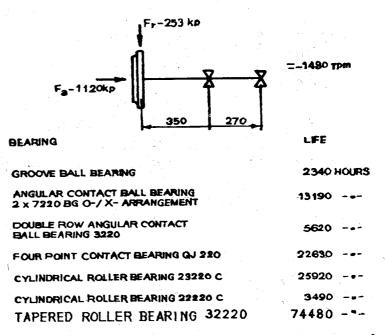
A Bearing Unit with Tapered Roller Bearings
